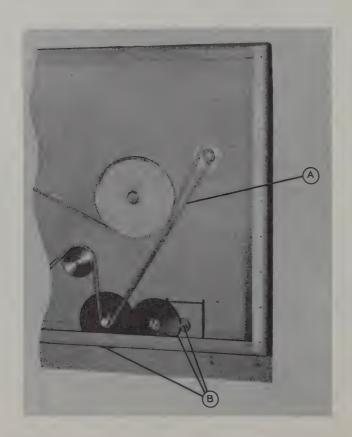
Lubrication of PA Plate Tank Drive Assembly, Bottom View.
